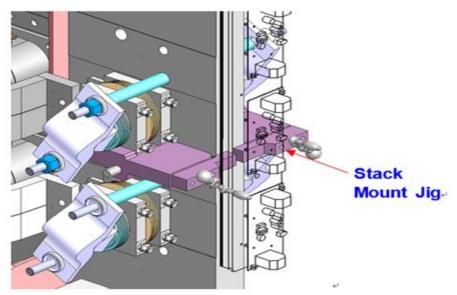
Schematic of using a stack mount jig to assemble a set of stacks onto a bus bar.
